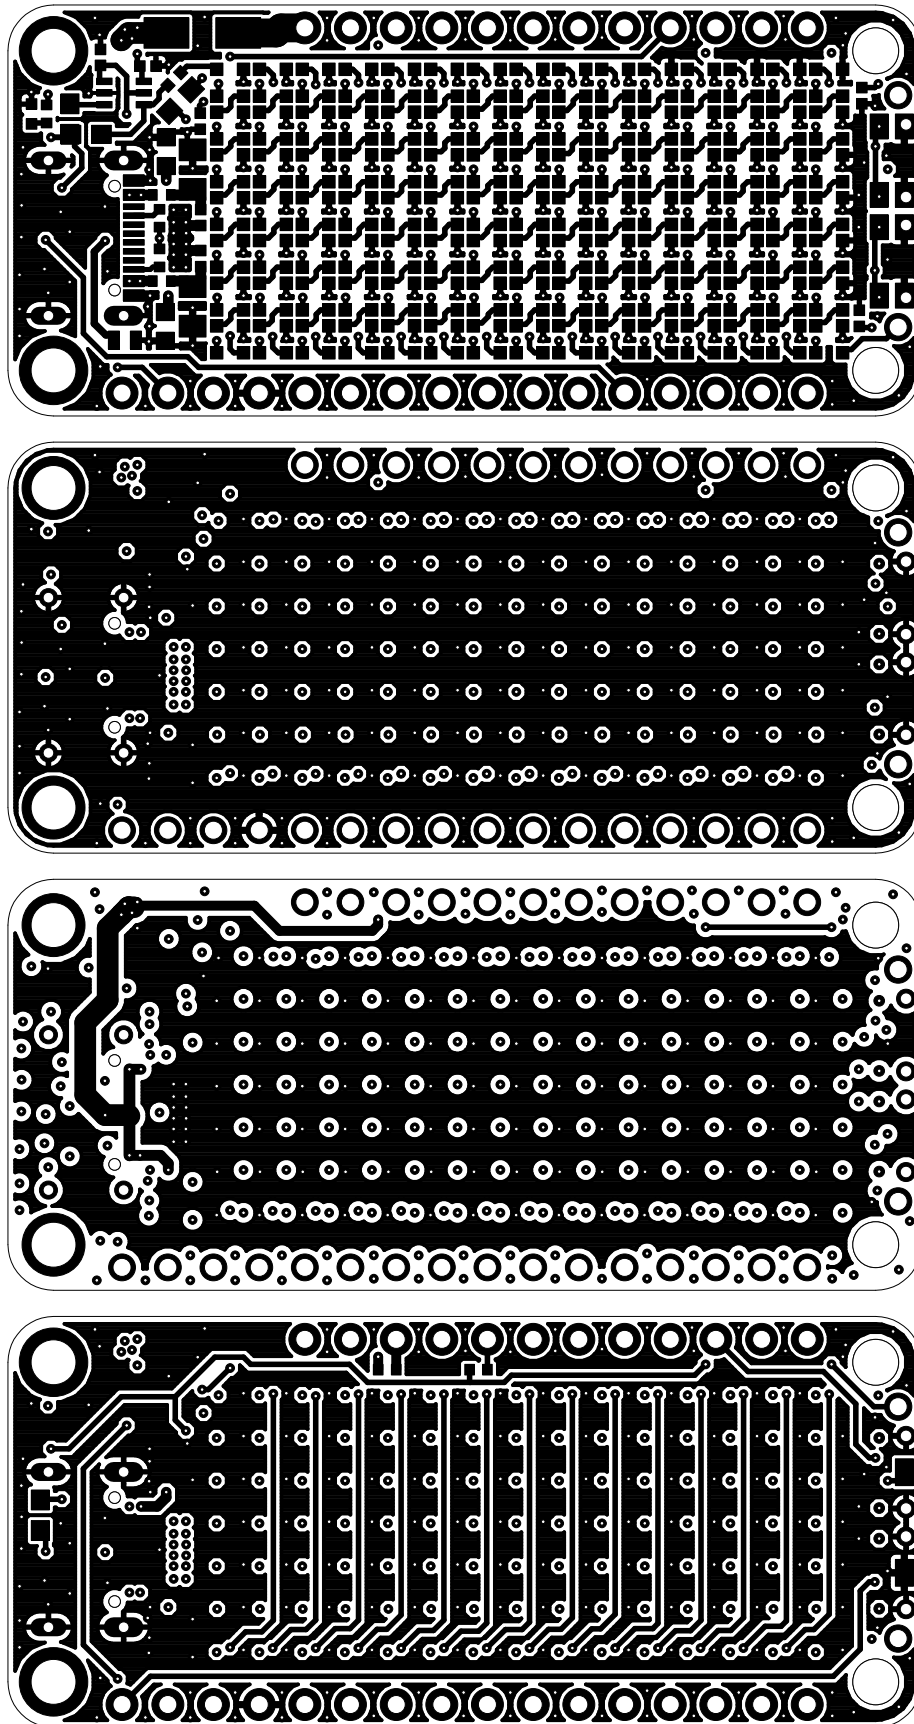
Top layer (upper), layer 2 (second), layer 15 (third) and bottom layer (bottom)
